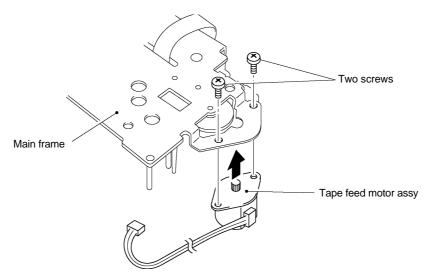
Reassembly of the Tape Feed Motor Assy
